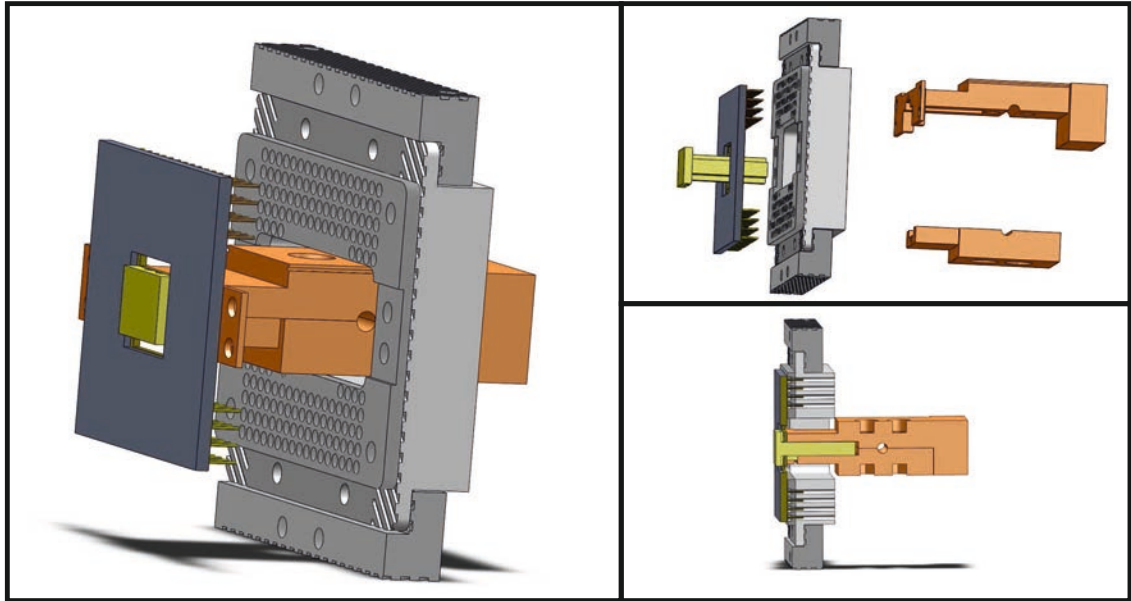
Showing the chip carrier and copper chip holder attached to the thermal bridge. The chip bracket of the vacuum system is included to illustrate the size of the thermal bridge with respect to the chip bracket cavity. Exploded and cutaway views demonstrate how the individual parts are assembled.
